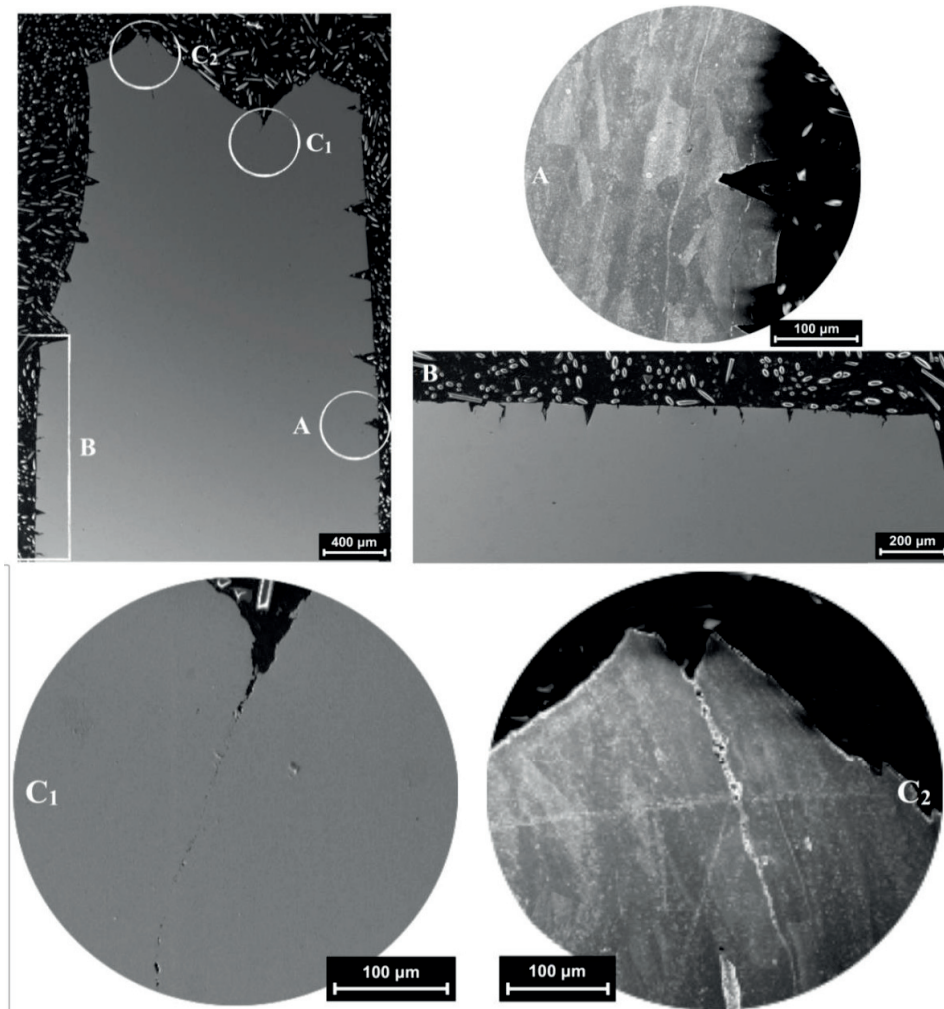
Details of the cracks observed in the longitudinal cross-section of the standard sample S333 in HTW. A, etched detail of the crack in the gauge section (etched with "V2A-Beize"); B, gauge section cracks; C<sub>1</sub>, fracture surface dimple detail with aligned voids towards the gauge section; C<sub>2</sub>, etched fracture surface dimple showing TG voids alignment towards the gauge section (etched with "V2A-Beize"). A and C<sub>2</sub> images are obtained with the in-lens detector whereas the other images are obtained with the secondary electron detector.
